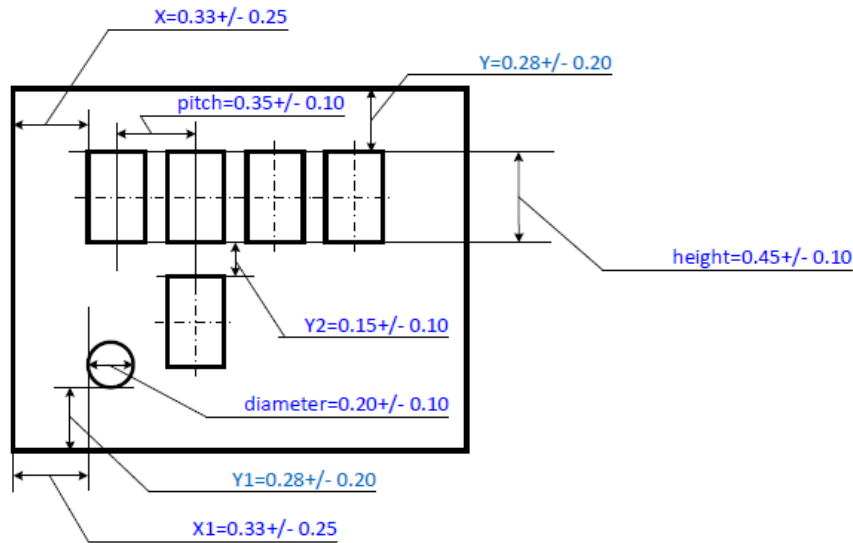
Standard Marking Dimensions for 2.0 x 1.6 mm Package
